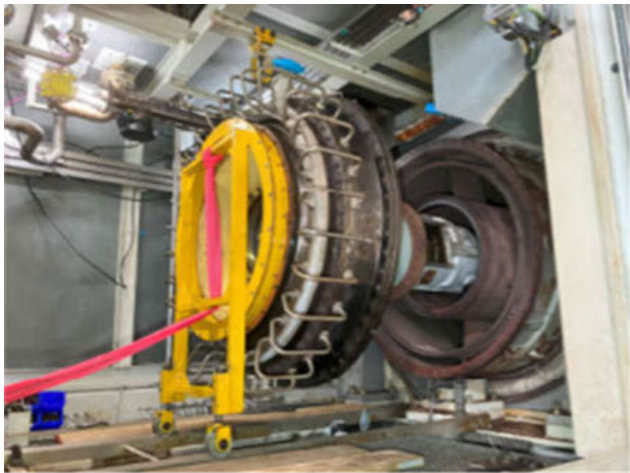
[redacted] 2A - HSPT assembly removal and installation into shipping container
